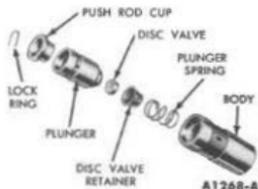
Typical Hydraulic Valve Lifter Assembly
